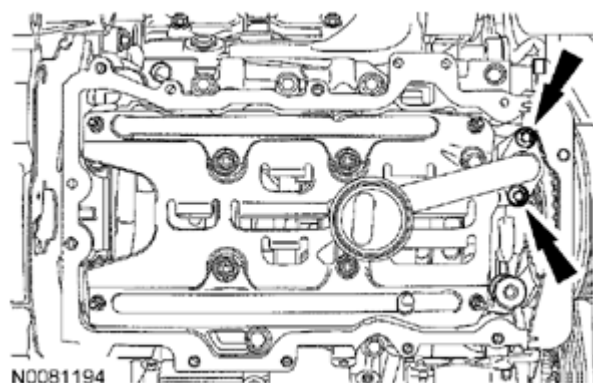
Locating Oil Pump Screen And Pickup Tube Bolts
